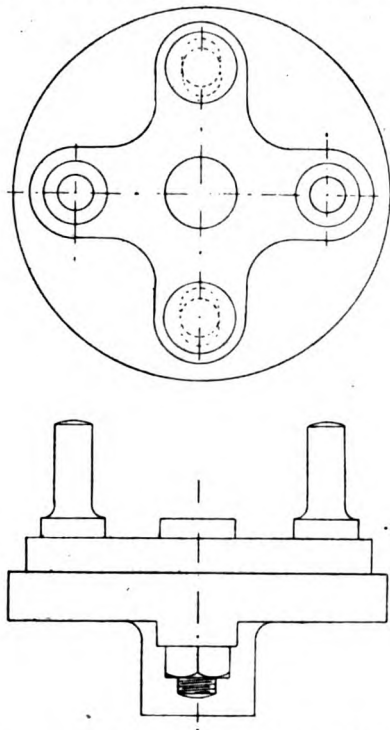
DOUBLE DRIVER FOR LATHE CARRIER.
